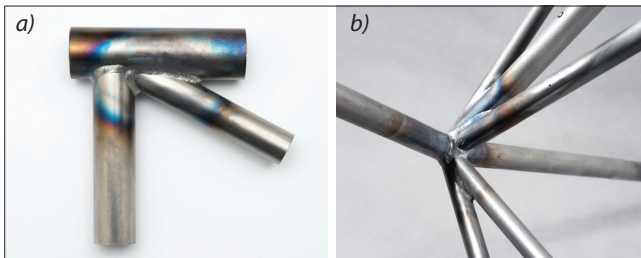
Observed examples of truss nodes: a) simple automatic welded node, b) complex knot welded by hand
